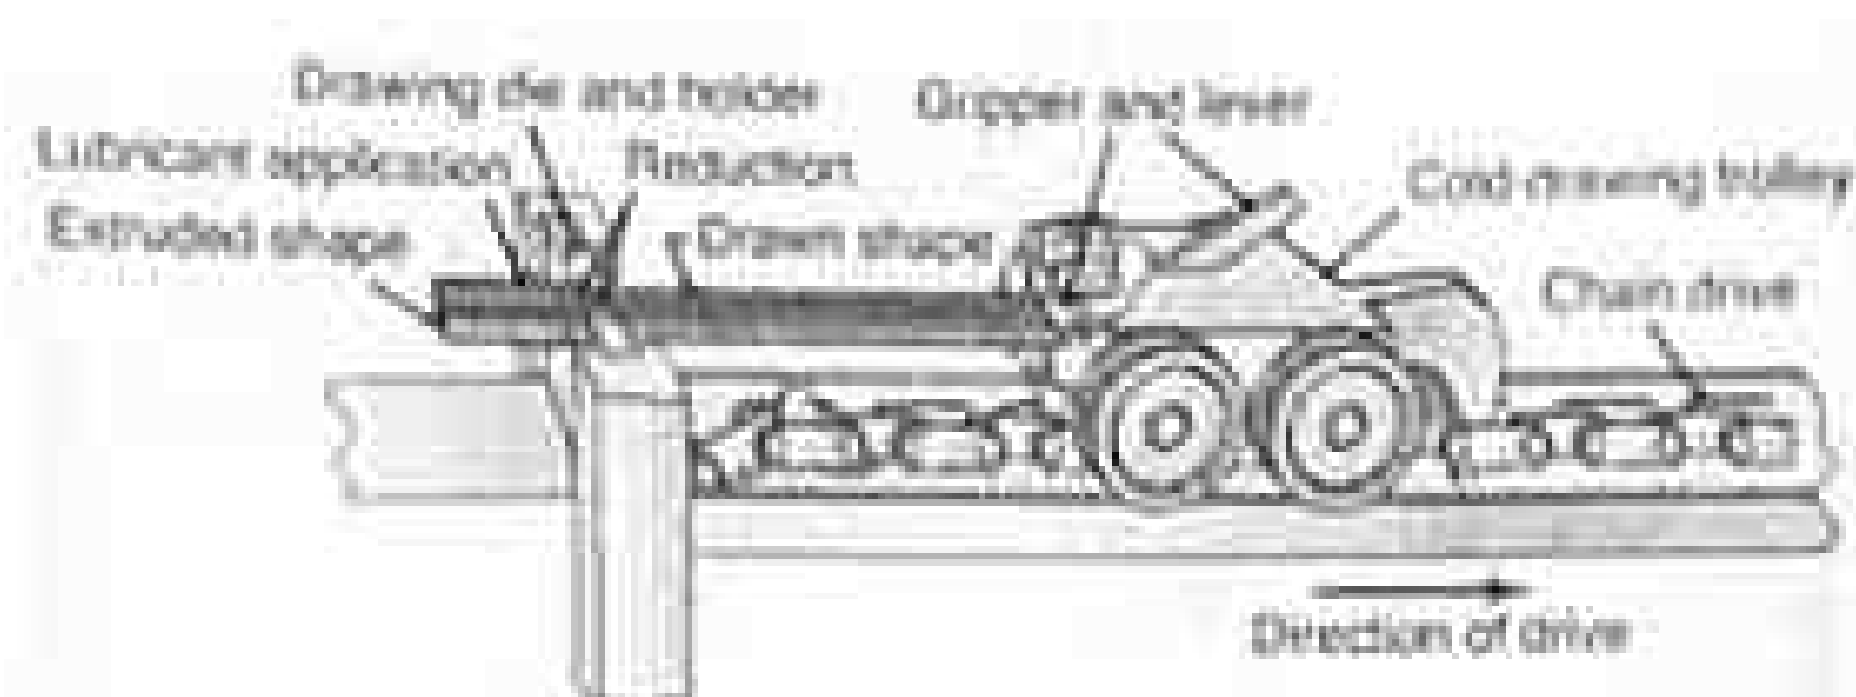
Cold drawing of an extruded channel on a draw bench to reduce its cross-section; individual lengths of straight rods or of cross-sections are drawn by this method.
